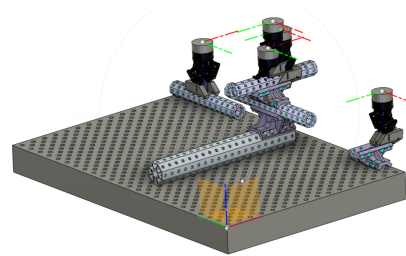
Assembly Design file showing the assembly jig, custom-designed gripper adapters, grasping, and insertion states of the gripper. *Assembly state*: Center of the table. *Jig state*: Top and bottom right of the table.
